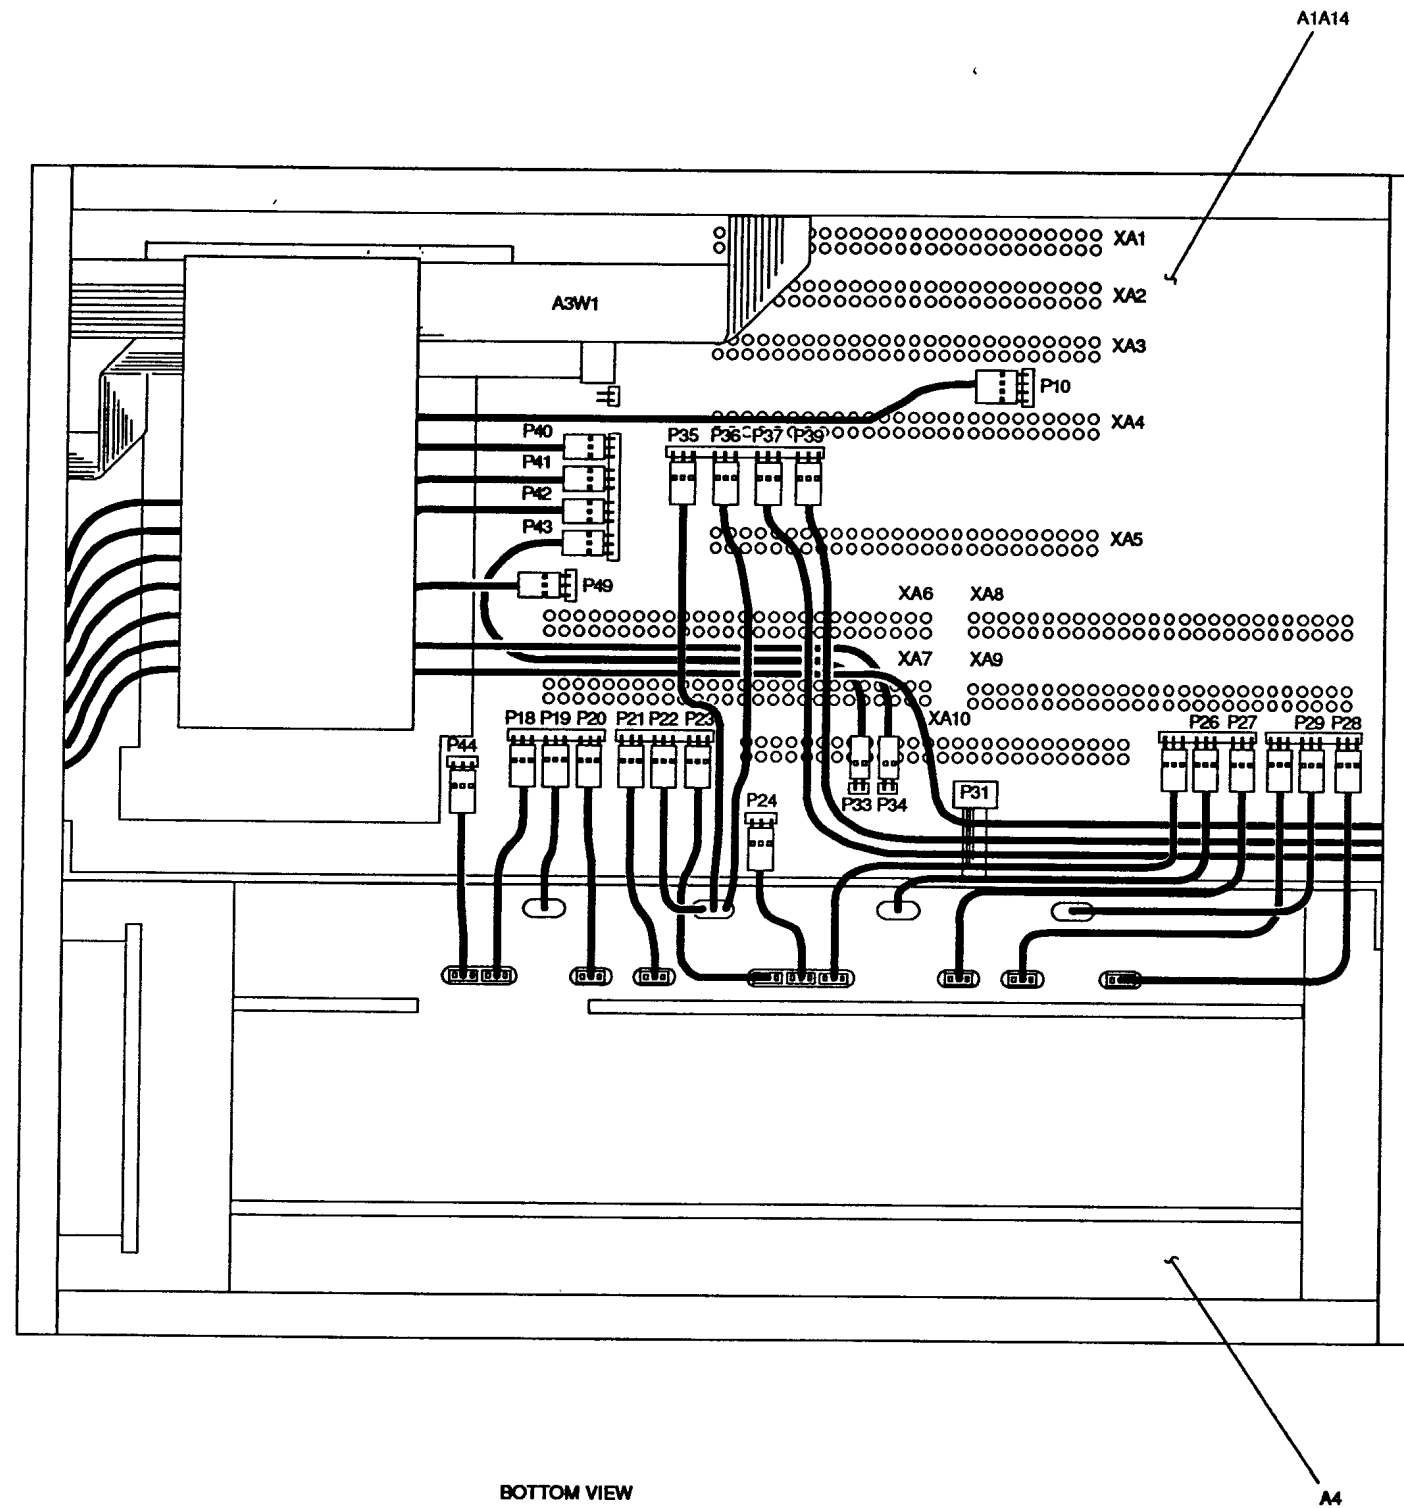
Connector-Location and Cable-Routing Diagram, Bottom View (2 of 2)
